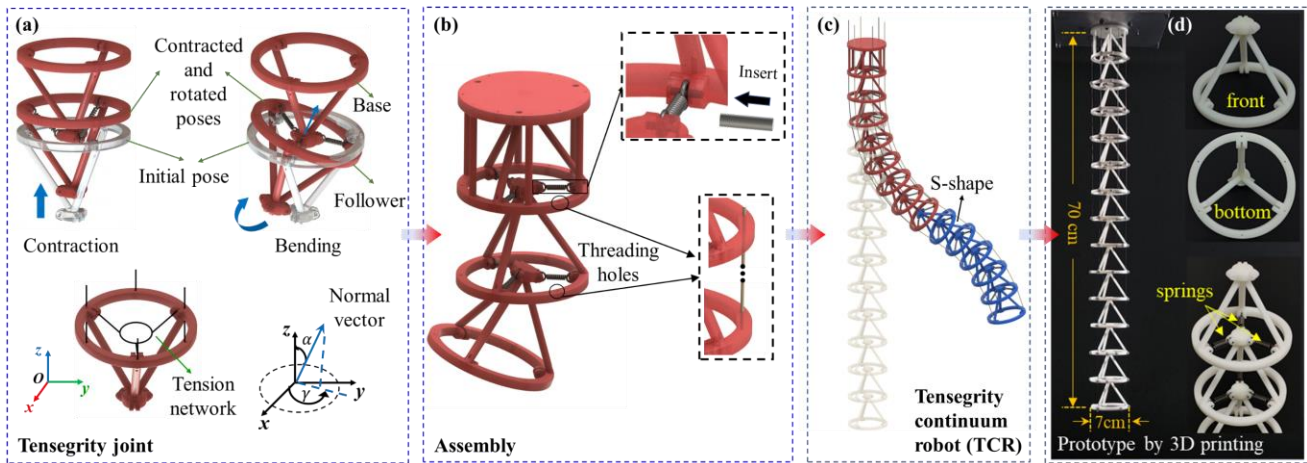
Fabrication of the TCR: (a) the compliant tensegrity joint; (b) assembly by the tensegrity joints; (c) the body structure of the TCR; (d) the 3D printing experimental prototype.
